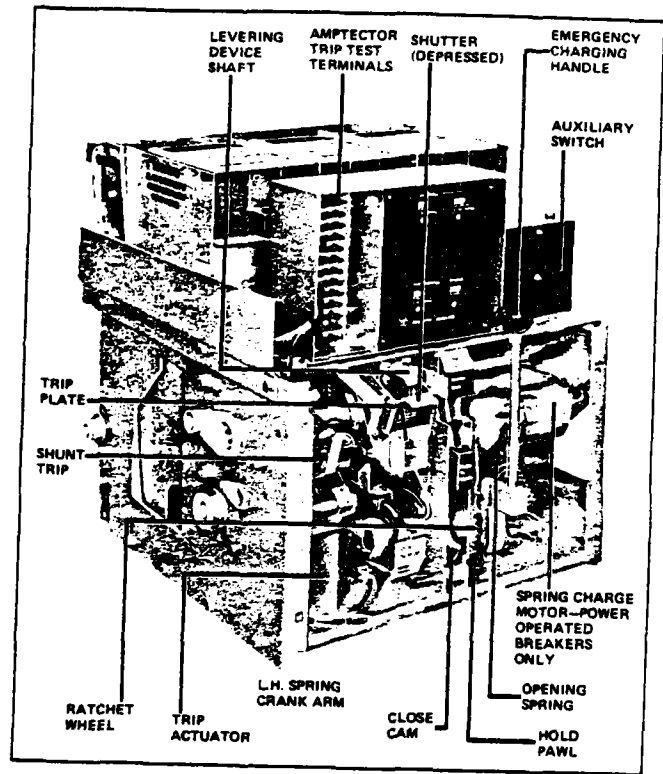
DS 416 Breaker with Front Panel Removed (391070)
